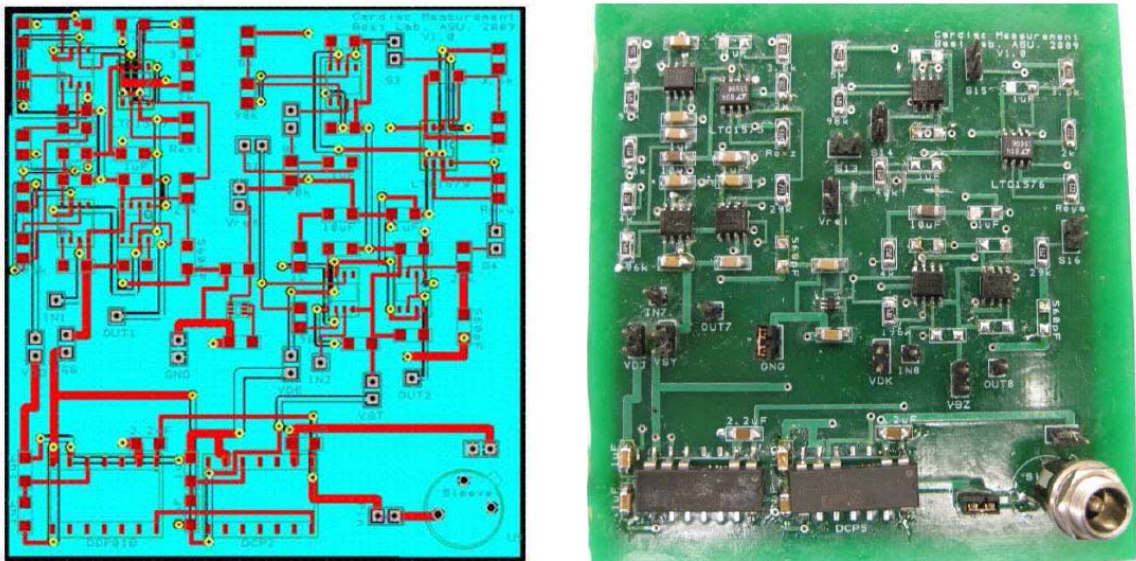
Custom designed printed circuit board layout (left) and picture (right) are shown
